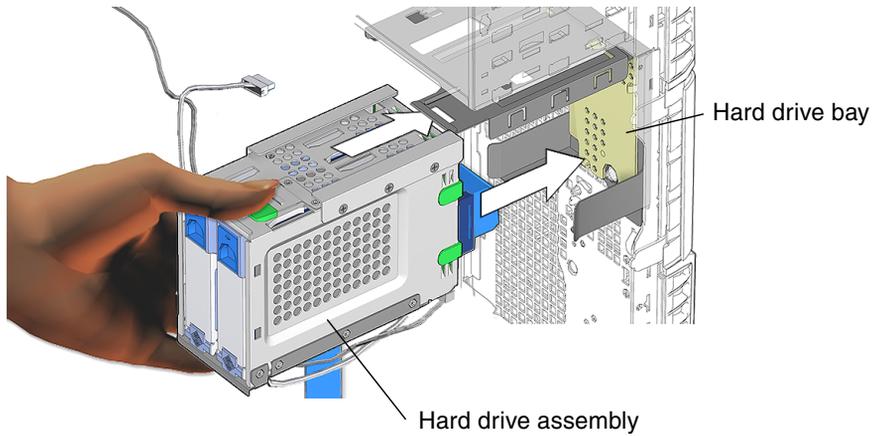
Sliding the Hard Drive Assembly Into the Hard Drive Bay
